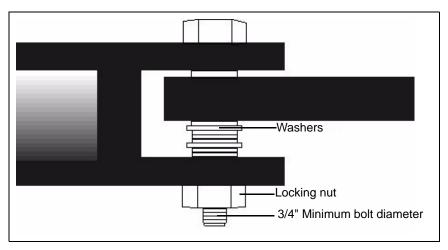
B A 3/4" Hitch Bolt and Washers Fastened with a Locking Nut at the Bottom of the Hitch
